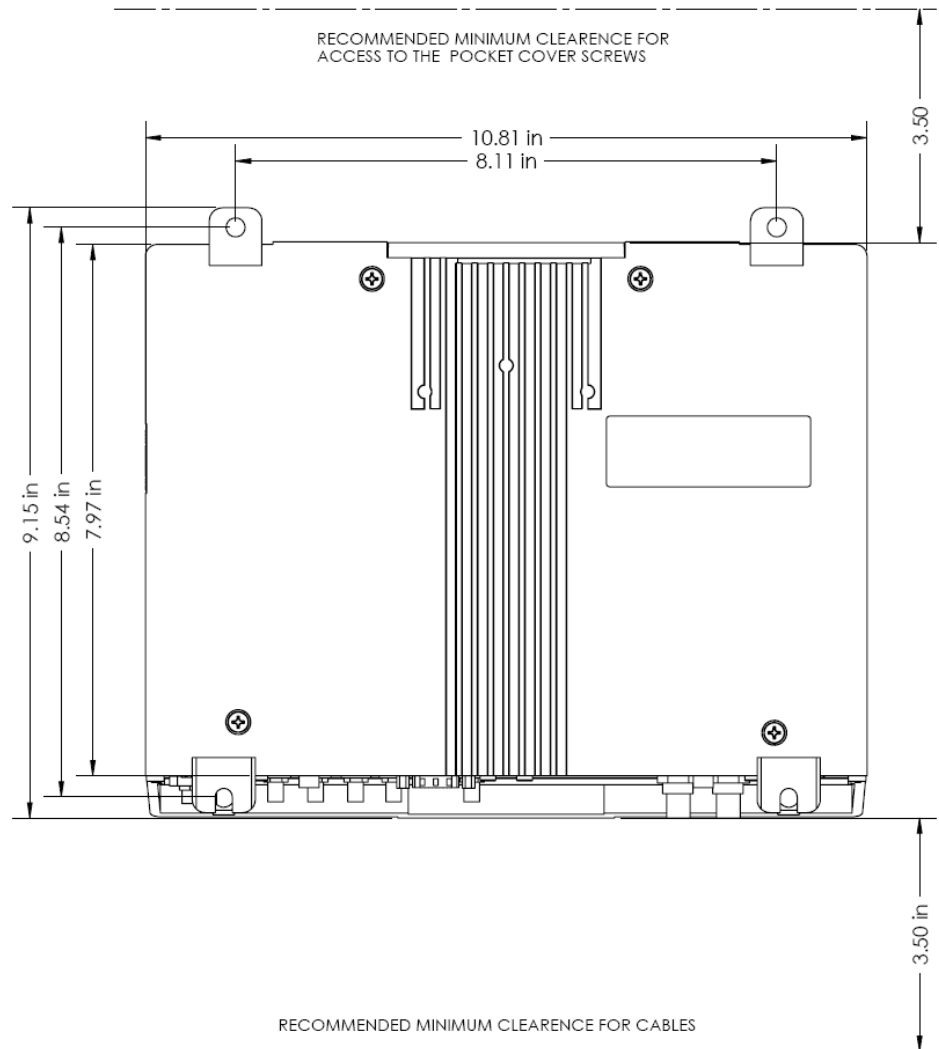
oMG Mounting Holes and Recommended Clearance
